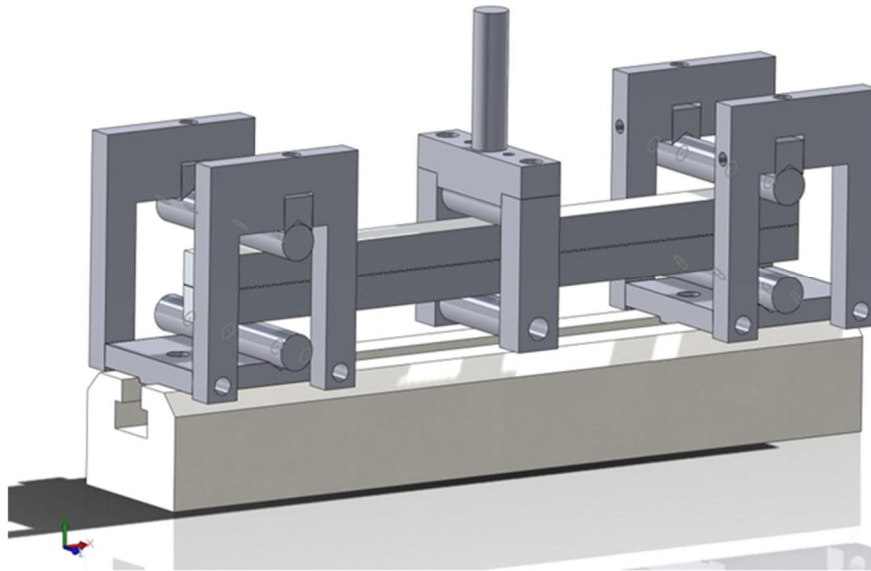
The test setup and jig design for  $R<0$  testing of ENF adhesively bonded specimen.
